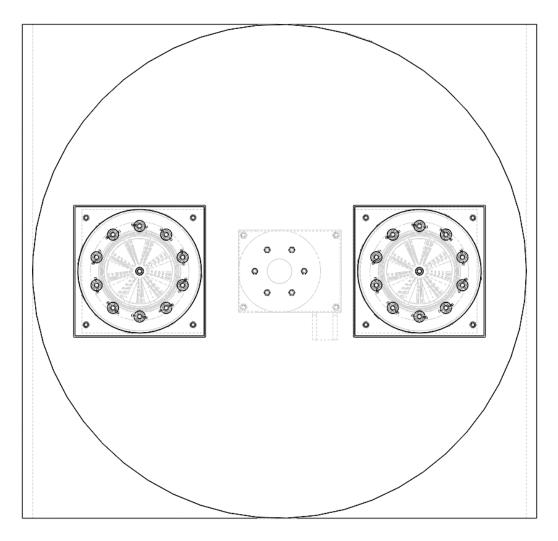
Assembly of rotating platform, deck and reactors - top view
